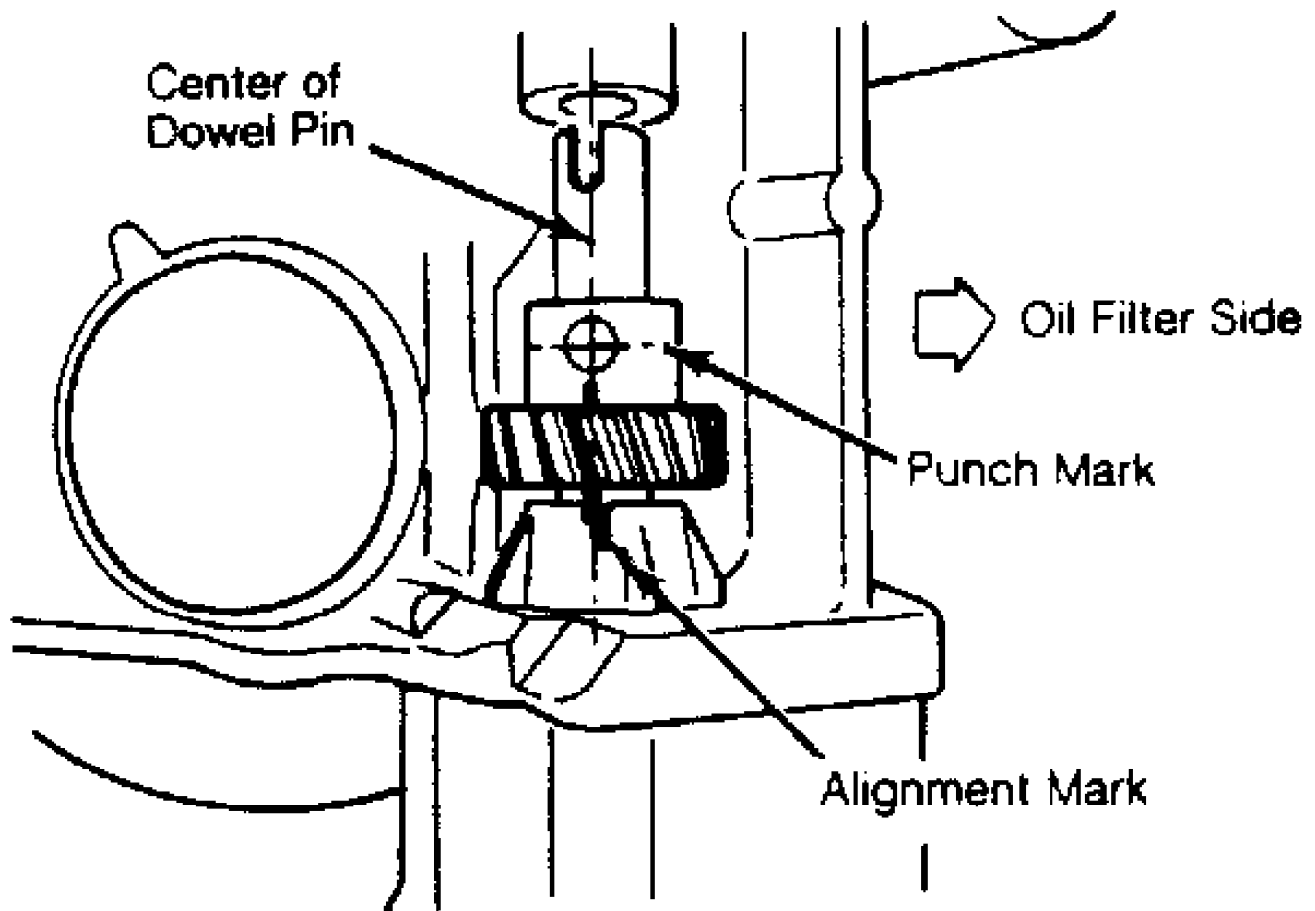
Aligning Oil Pump for Front Cover Installation on 1.9L Models
